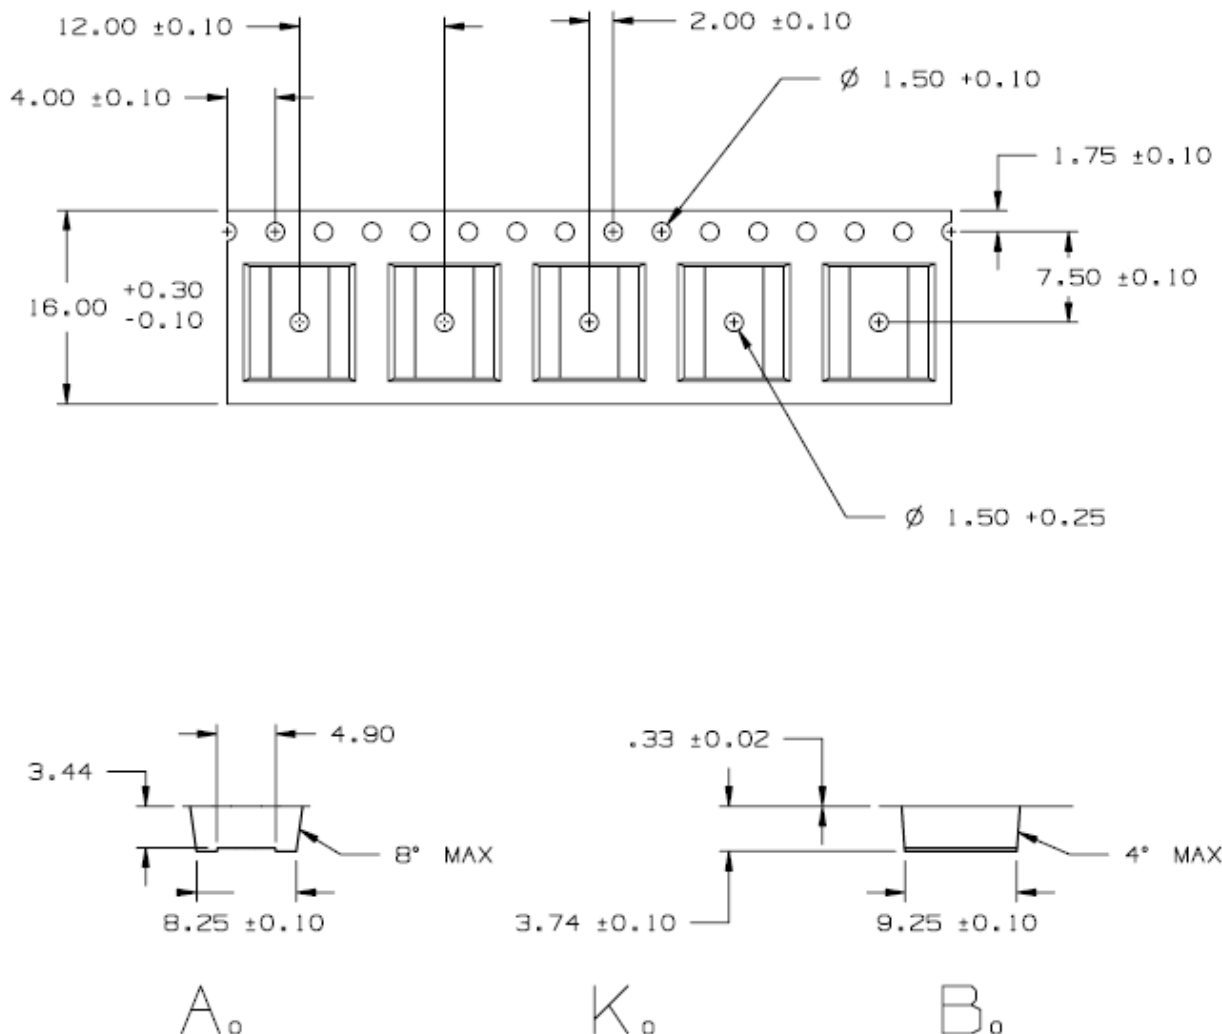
Packing tape dimensions for the 12 lead DFL Package. Dimensions in millimeters [mm].
